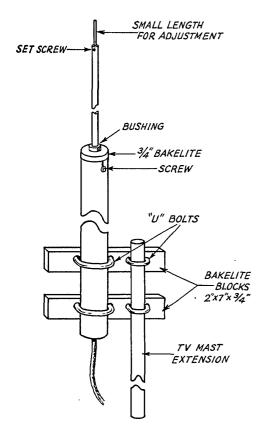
Sketch showing the completed antenna and mounting assembly.
